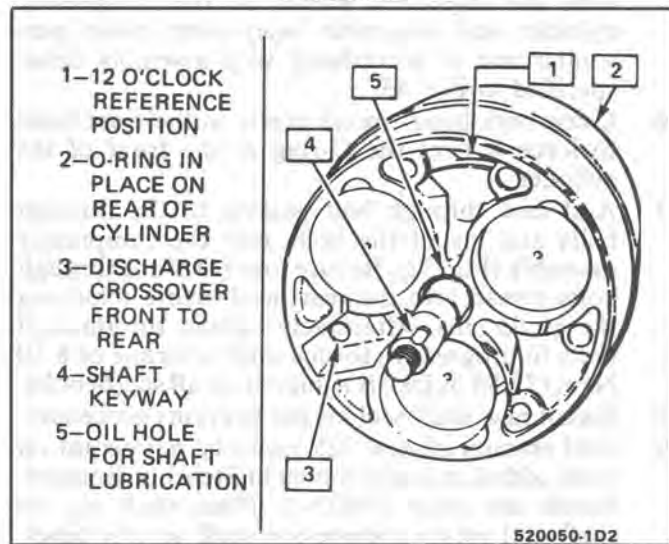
Front View and Detail of DA-6 Cylinder and Shaft Assembly
